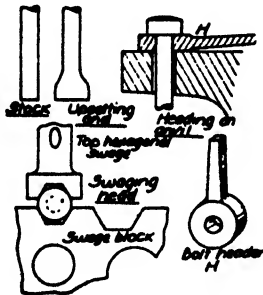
Sequence of Operations in Forging a Hexagonal Head Bolt.
